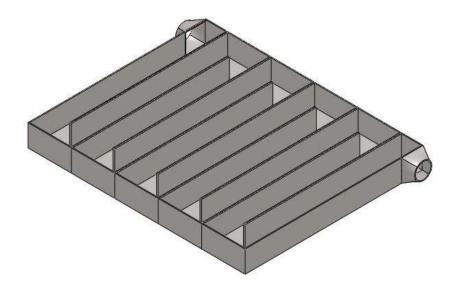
Design of Pre Heating Chamber of Heat Exchanger
